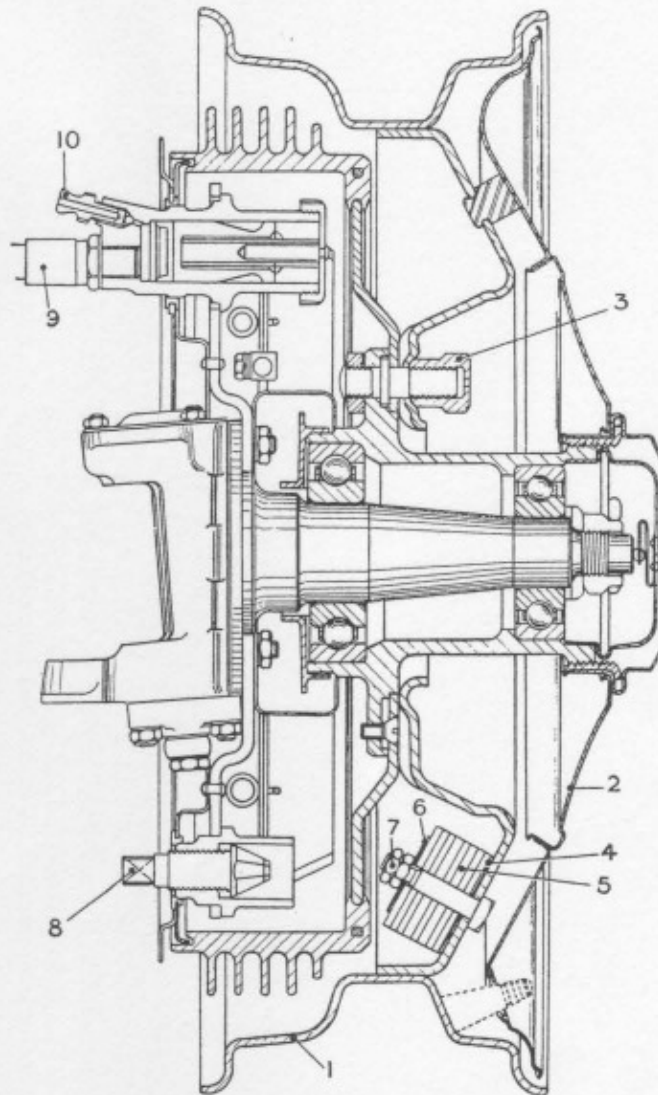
SECTION OF FRONT HUB AND WHEEL
